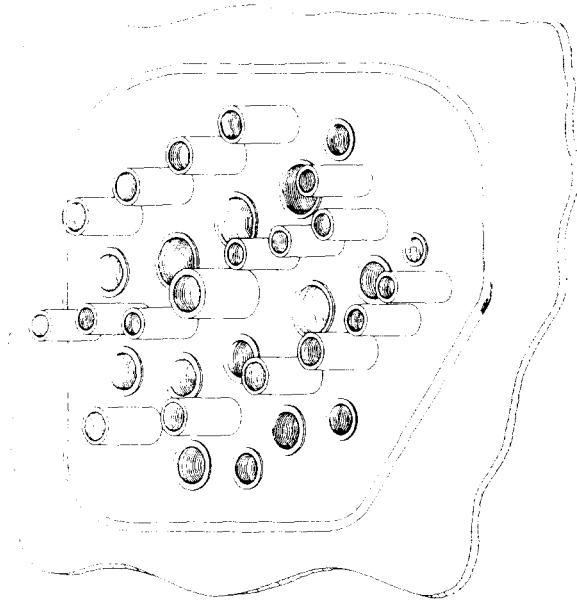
VIEW OF ASSEMBLED GLAND PLATE
